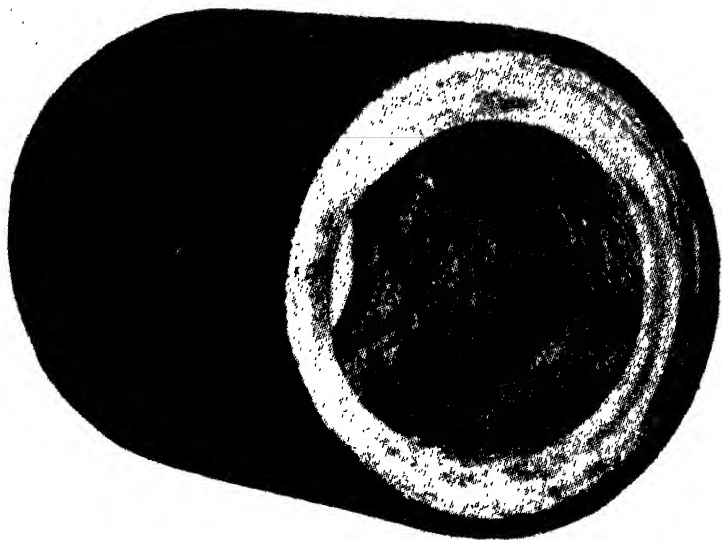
Cross-section of Partially Choked Boiler Tube showing Deposit of Scale.
